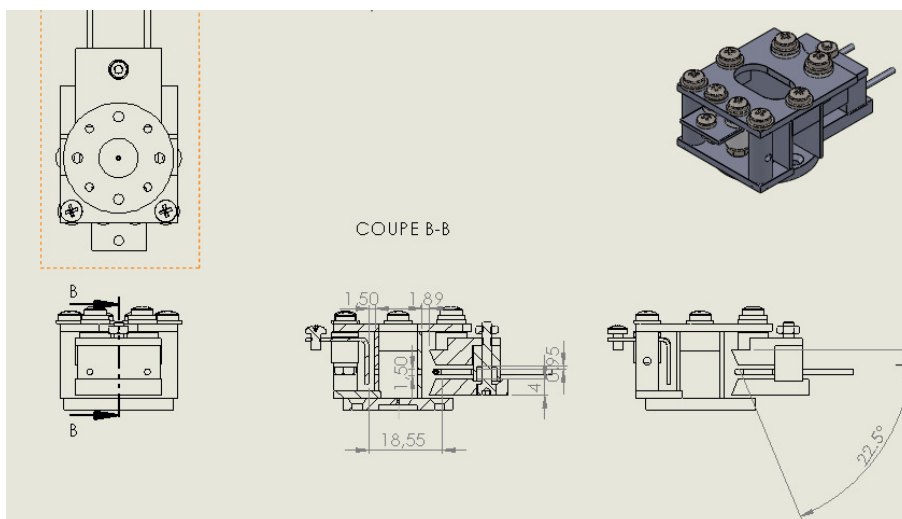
Solidworks drawing for the electro gun and some of its important dimensions.
